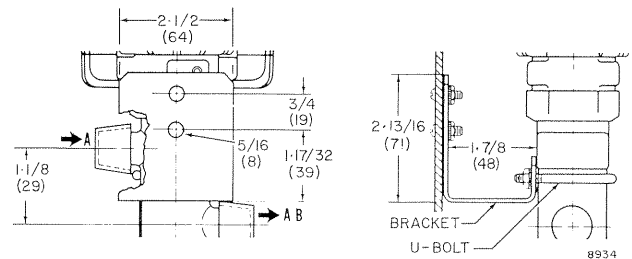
Bracket No. 313827A Dimensions in Inches (Millimeters).
